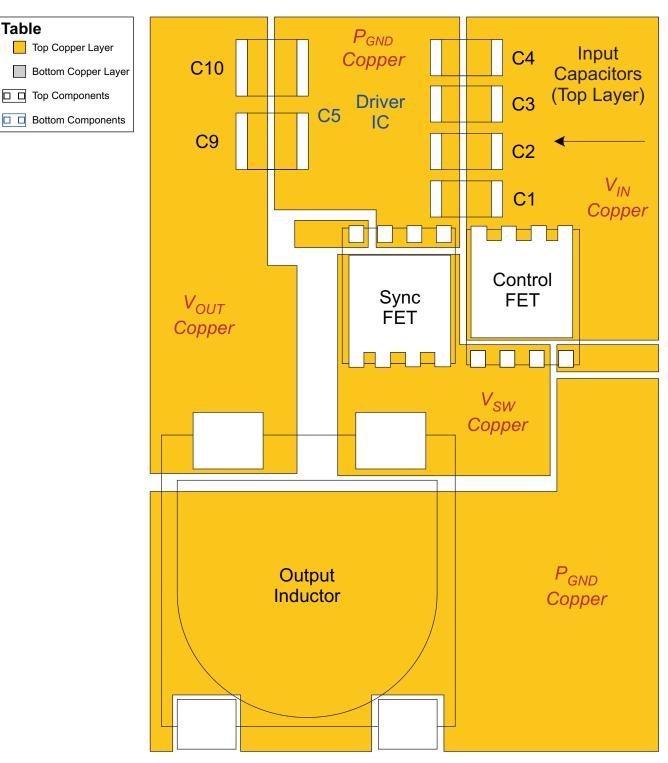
Optimized Placement and PCB Layout of Power Stage Components
